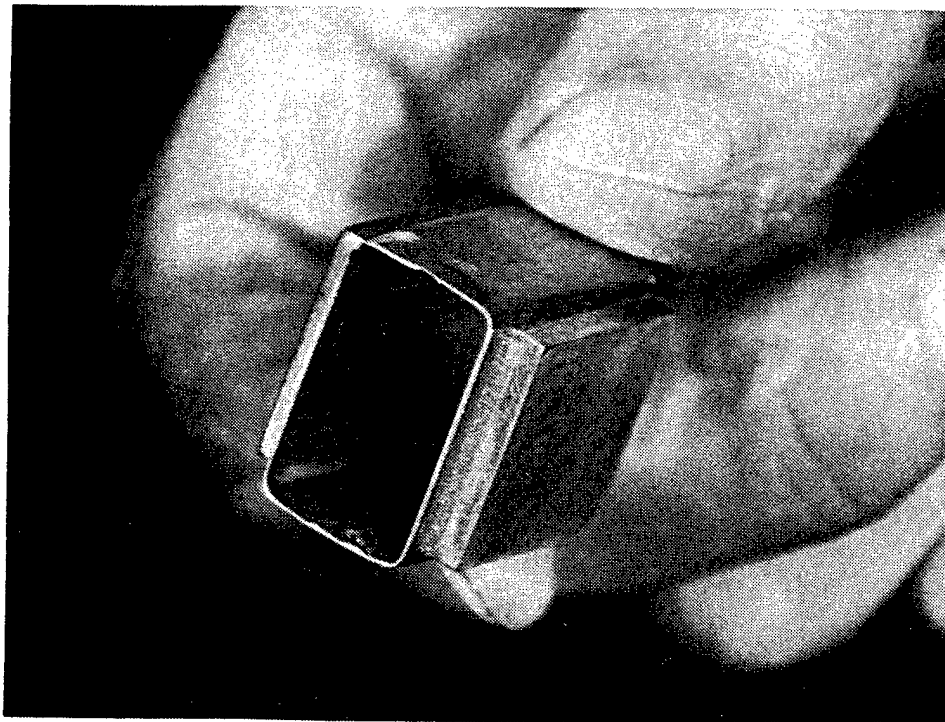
Fabrication Test Specimen of Pumping Section of VCLCP
